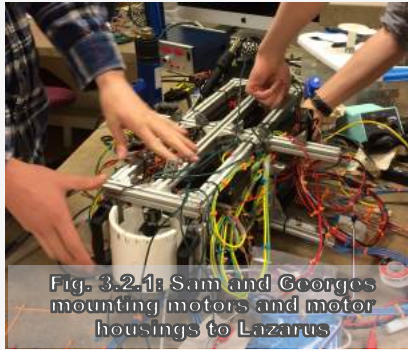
Sam and Georges mounting motors and motor housings to Lazarus
